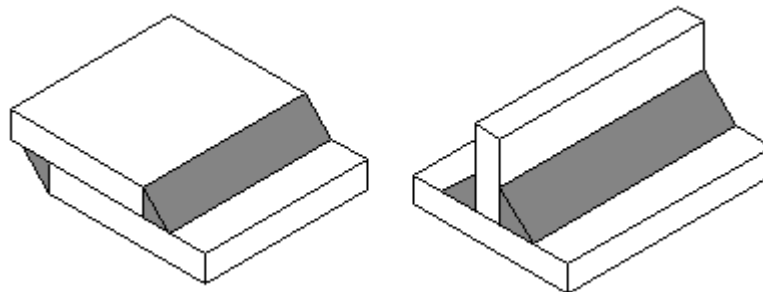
fillet welding diagram (*Welded Connections*)
